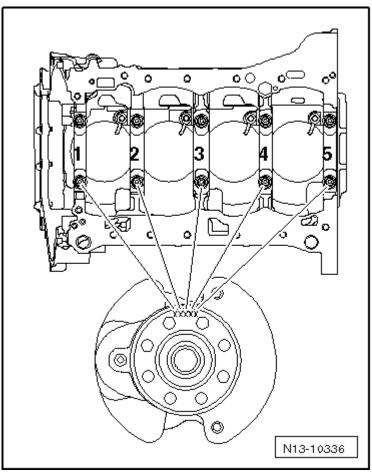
Locating Identification On Crankshaft Courtesy of AUDI OF AMERICA, LLC
